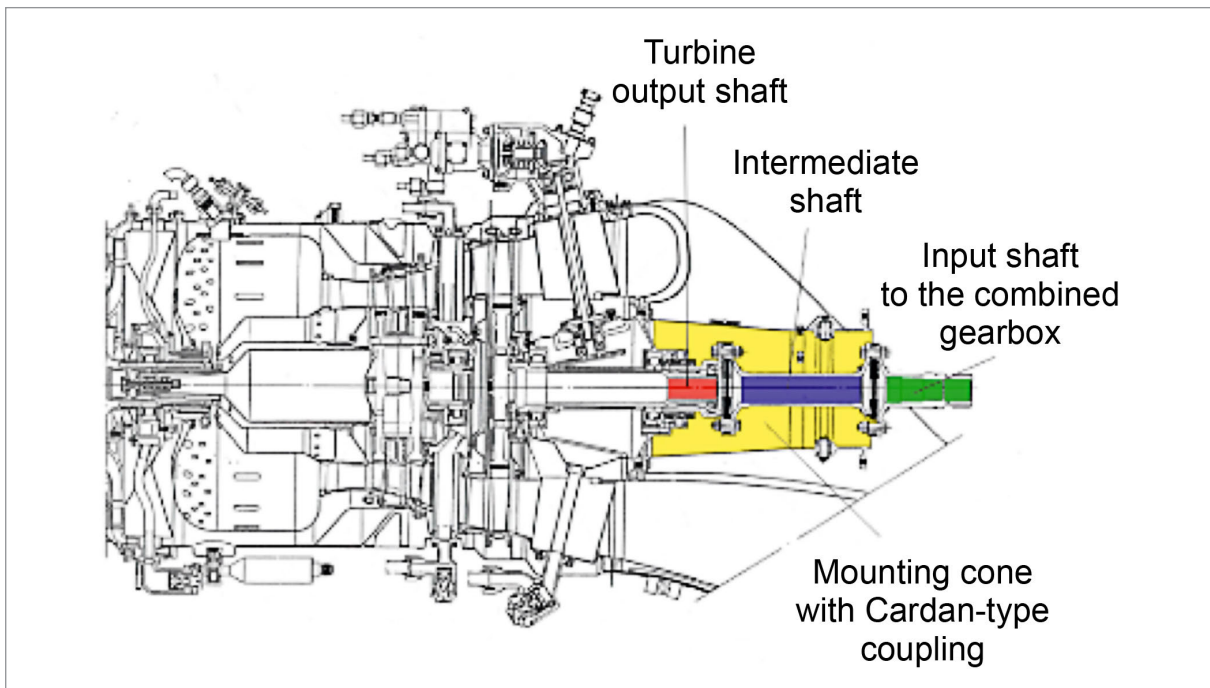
Cross-section of the engine to the entrance of the combined gearbox
